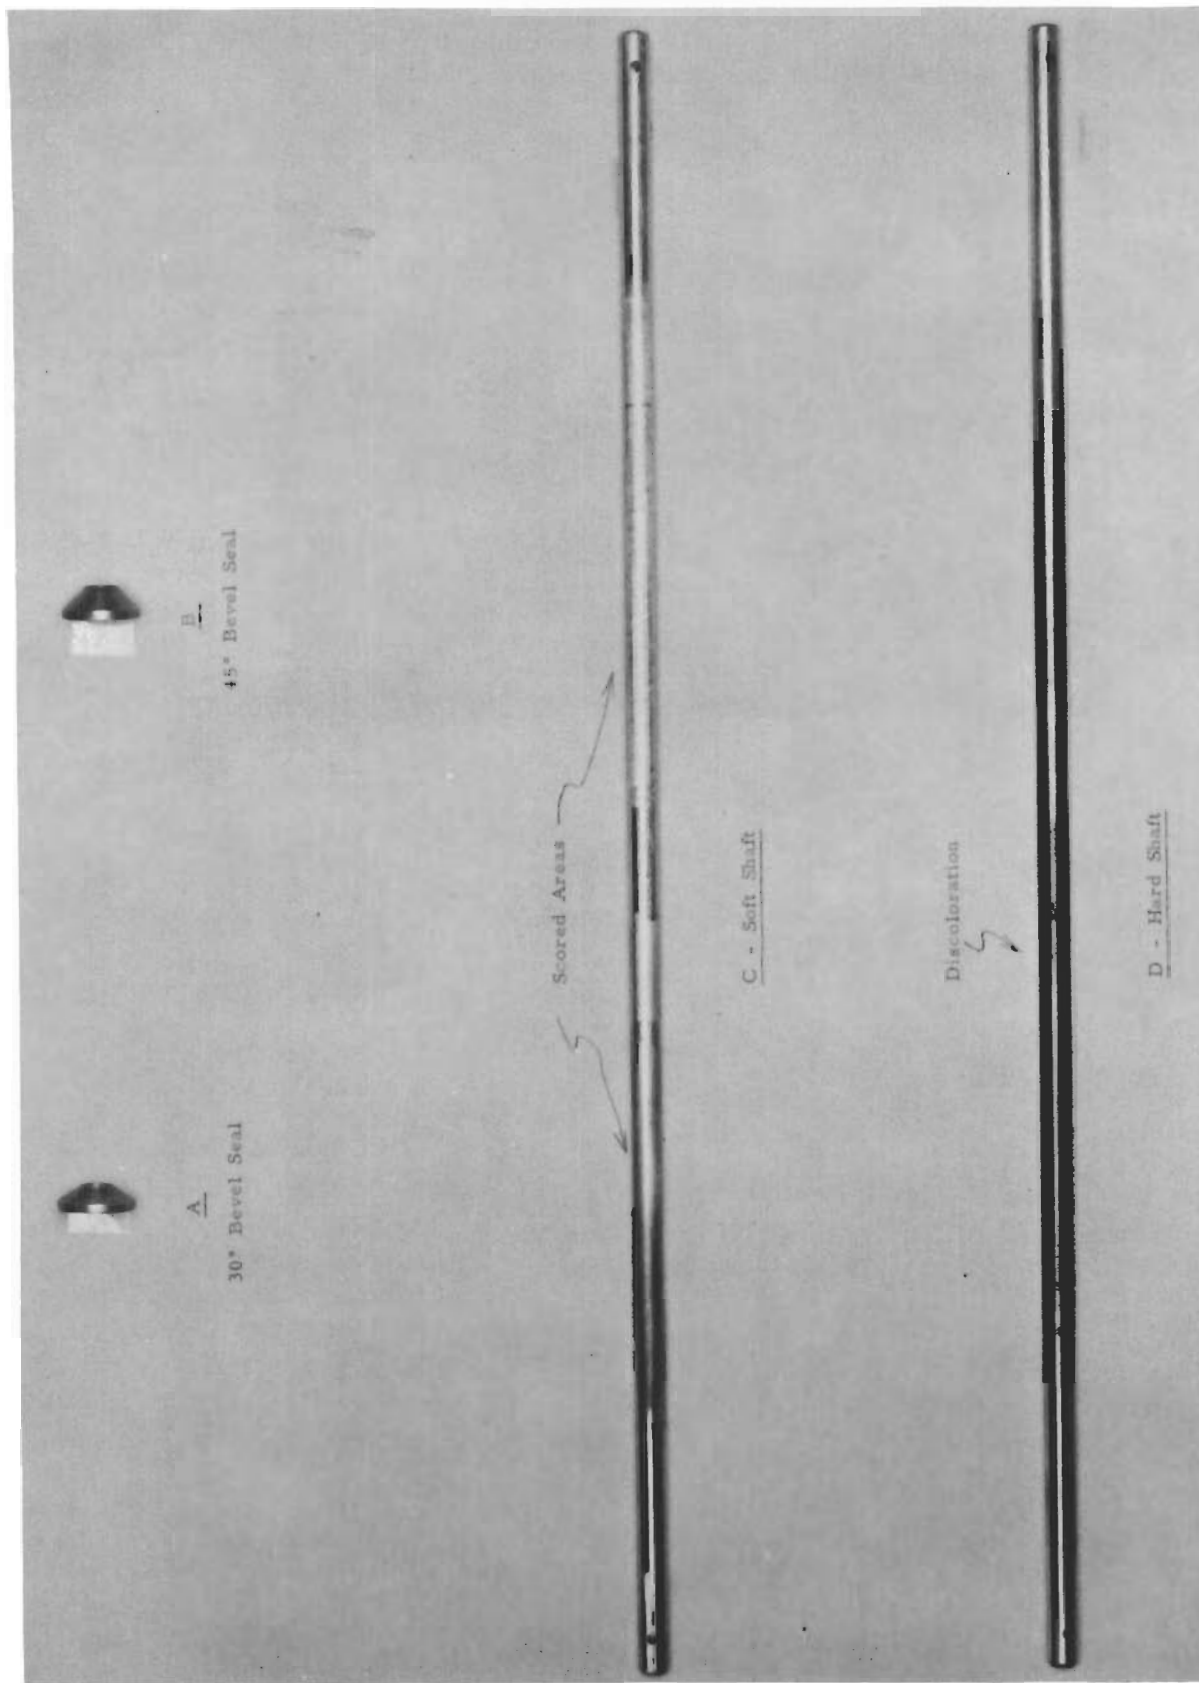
SEALS AND SHAFTS FOR RECIPROCATING FIXTURE
